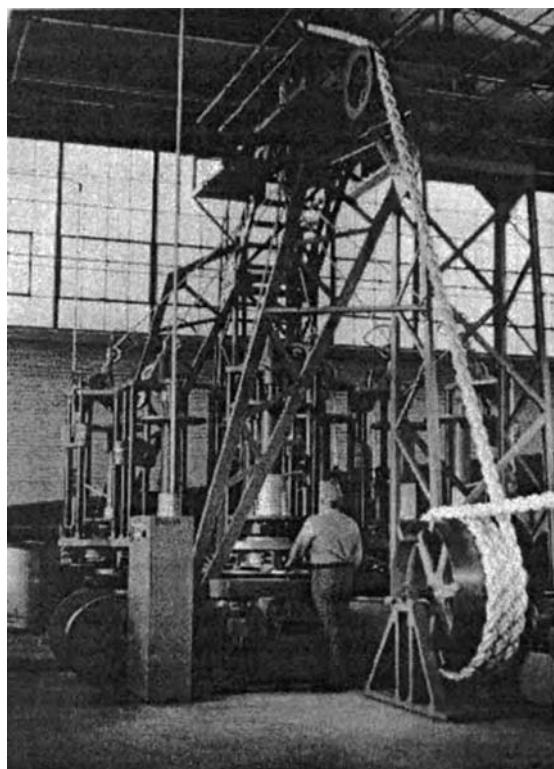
A large braiding machine for 8-strand plaited rope. Reproduced by courtesy of Wall Industries.
